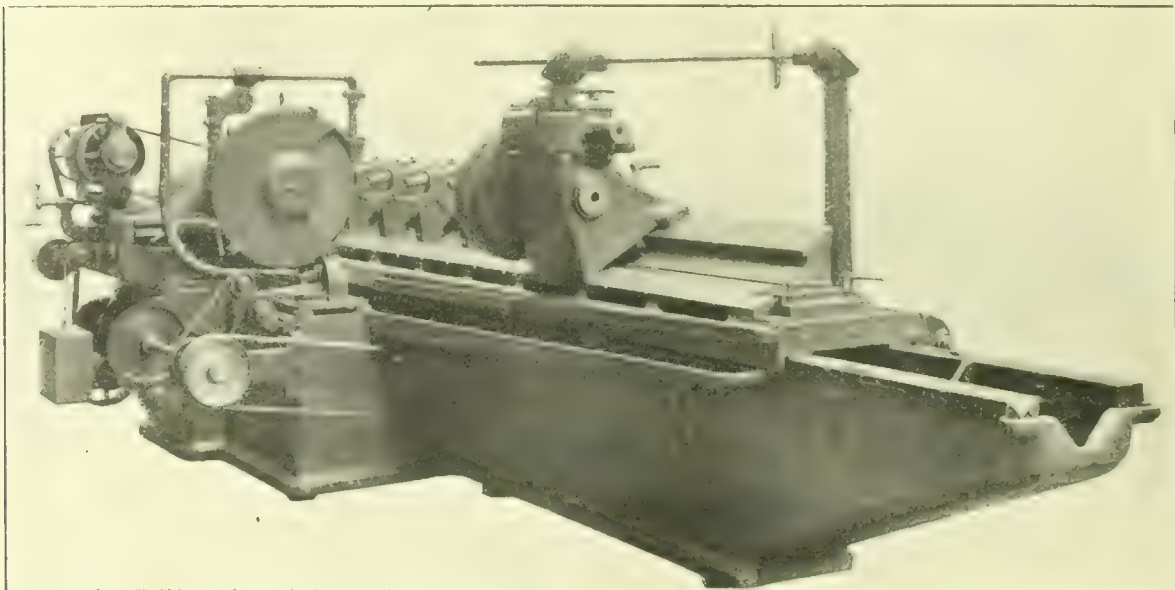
HEAVY CYLINDRICAL GRINDING MACHINE. (See p. 769)
